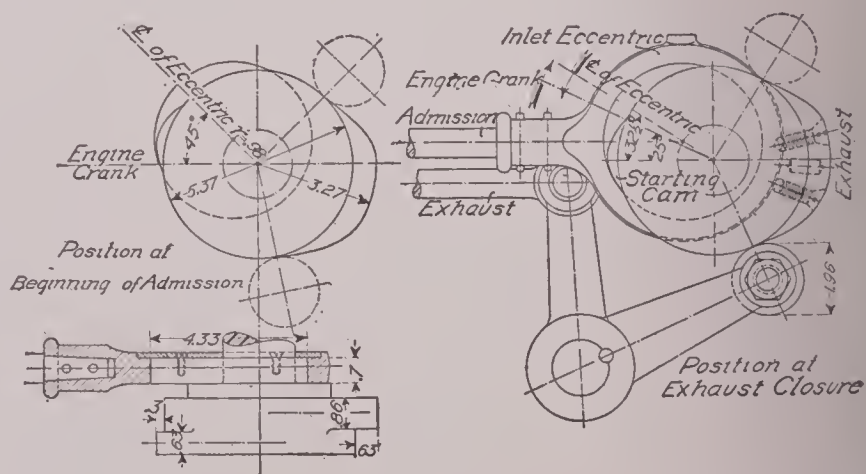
Combined 4-cycle Valve Gear and Pendulum Governor, G. Wenzel.
